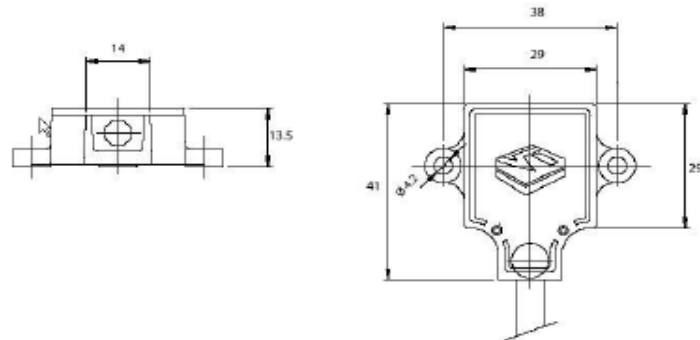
Mechanical dimensions of the SCA121T (dimensions in mm)
